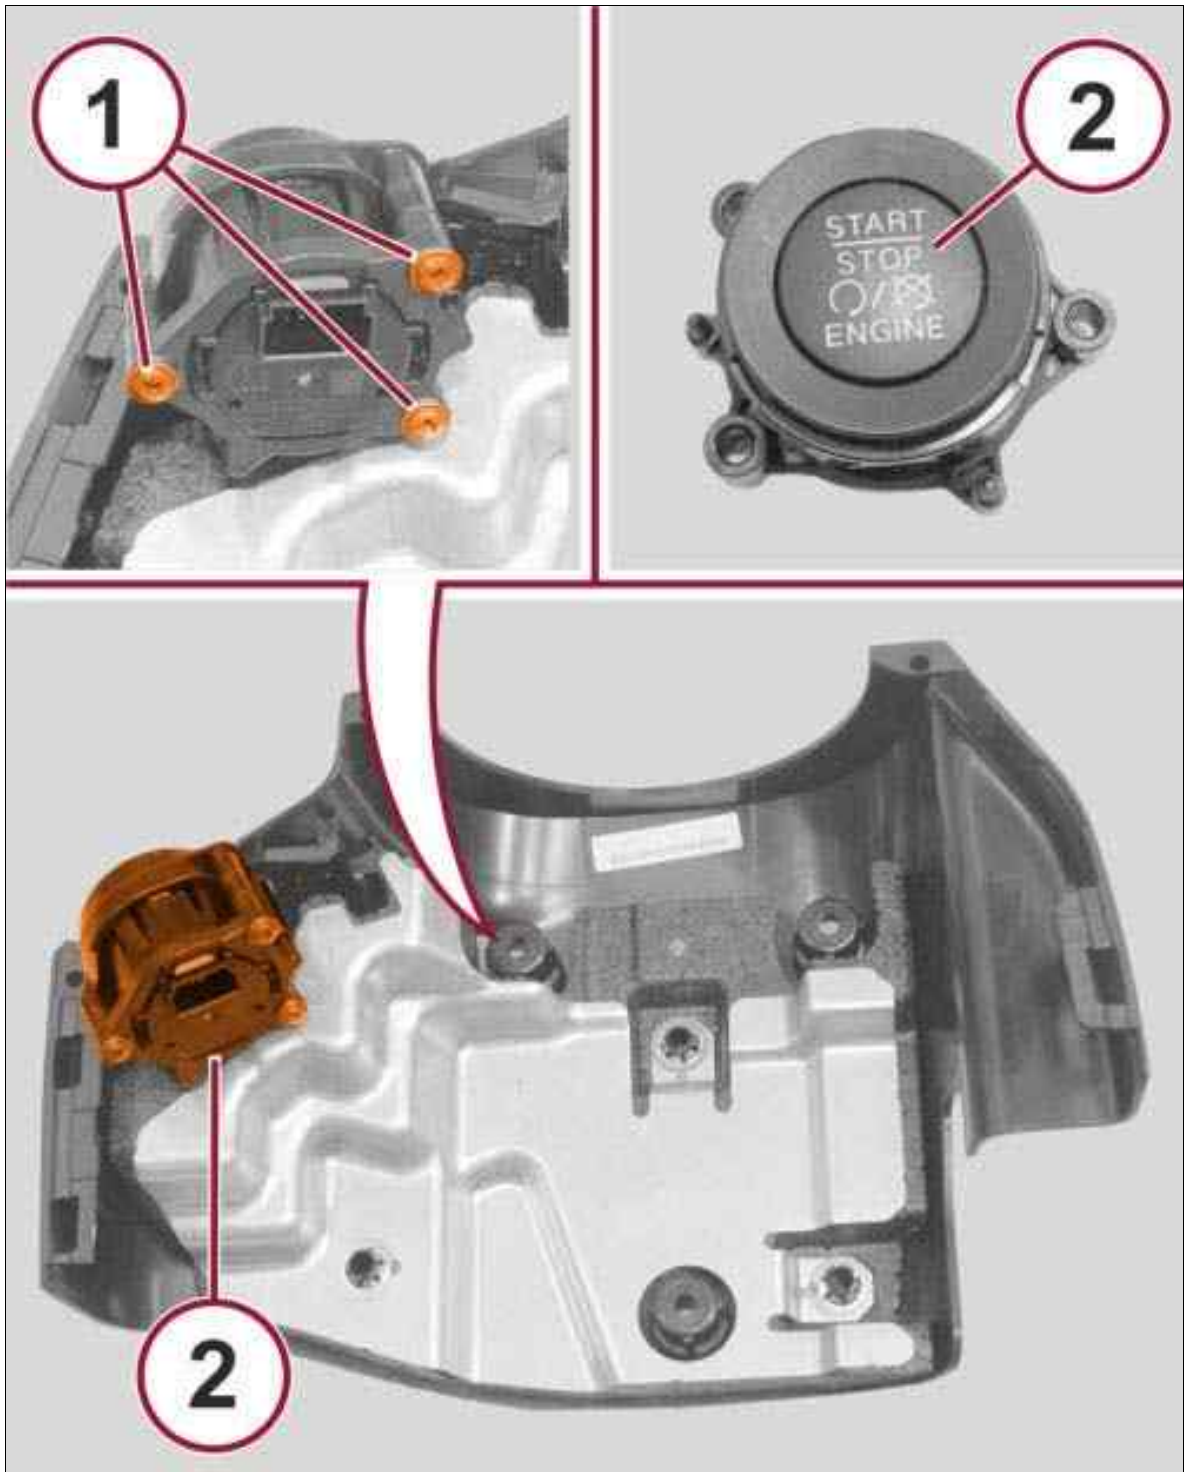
Steering Wheel Bottom Cover & Electrical Connector
